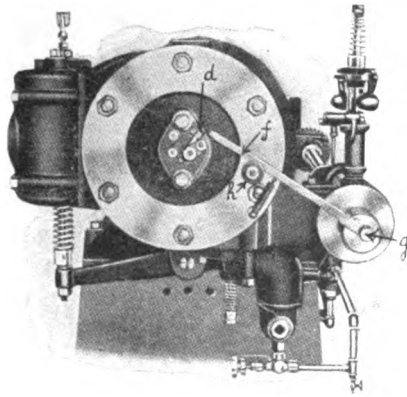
Igniter Gear or Reel and Van Dervoort Engine.
